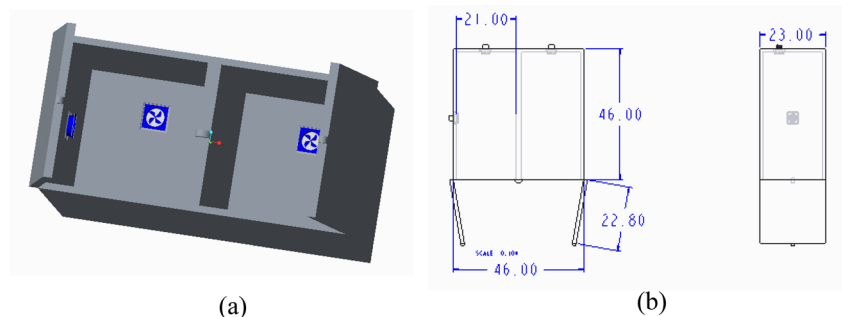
(a) Isometric view (b) Line diagram (the dimensions are in cm).
